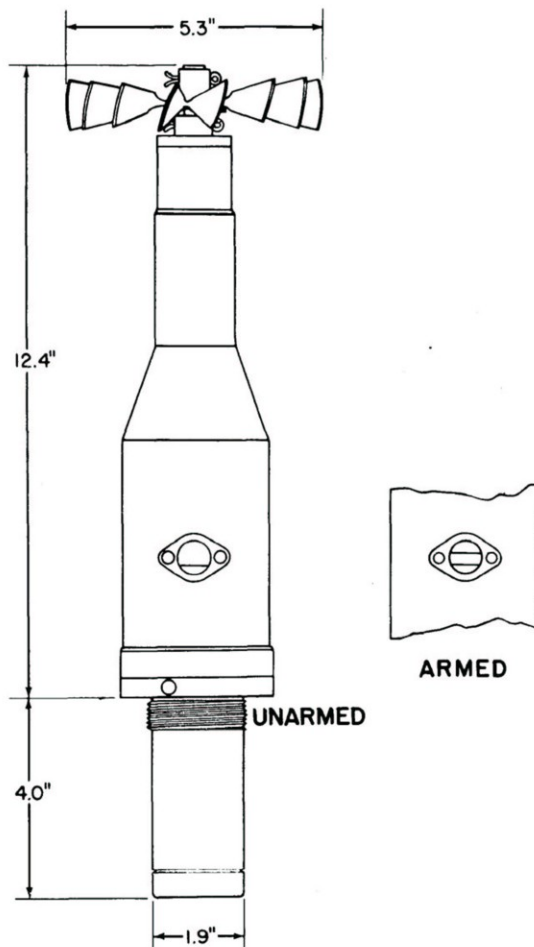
Outline Drawing of Tail Fuze Mk 223
